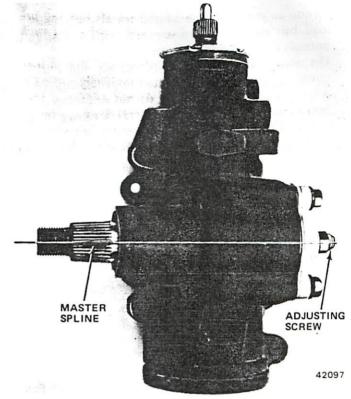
L-44 Pitman Shaft Master Spline Position with Gear Centered
